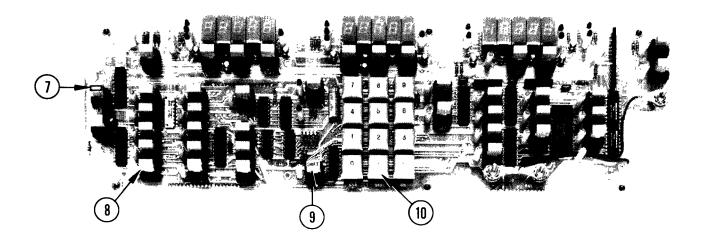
A15 Front Panel Assembly, Dwg. 660-D-8015 (See Figure 6-4 for next higher assembly) (Sheet 2 of 2)
